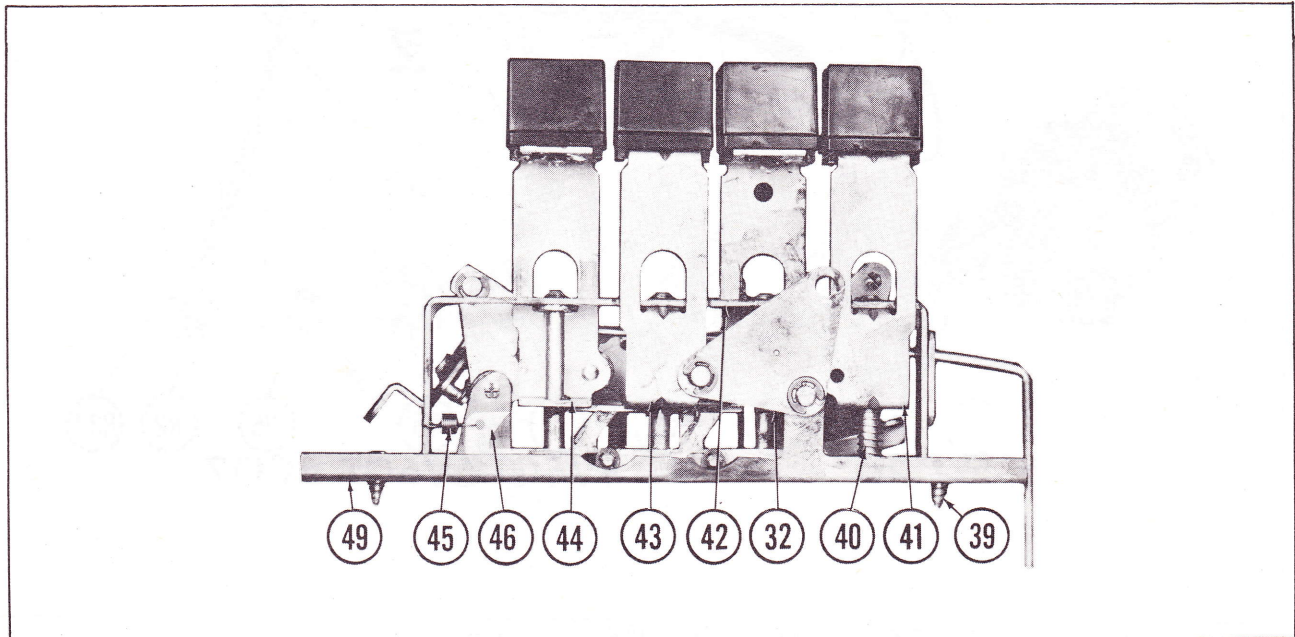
FRONT VIEW OF PUSHBUTTON ASSEMBLY.
